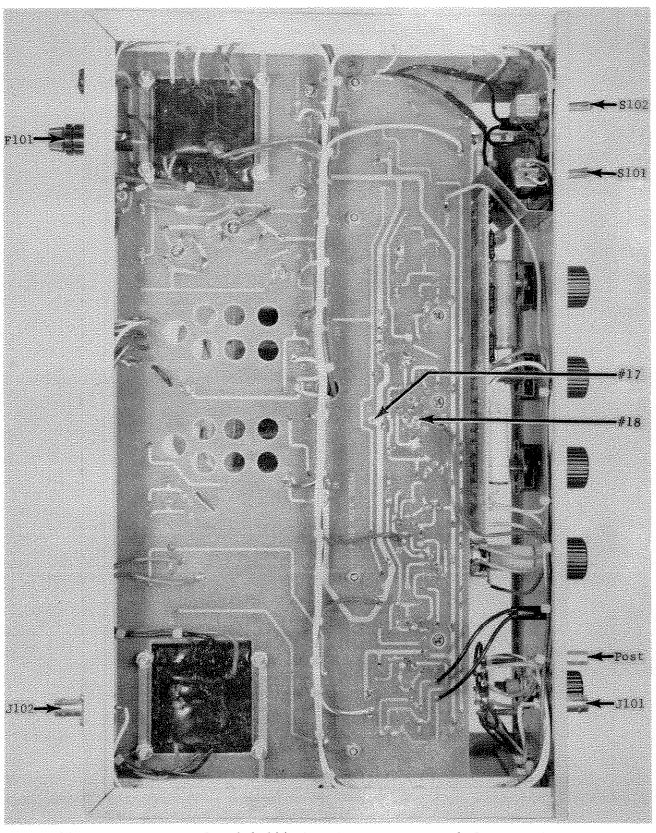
Bottom View of Model 246 Chassis. Front panel faces right. Figure shows location of switches and connectors. For top view refer to Figure 13.
